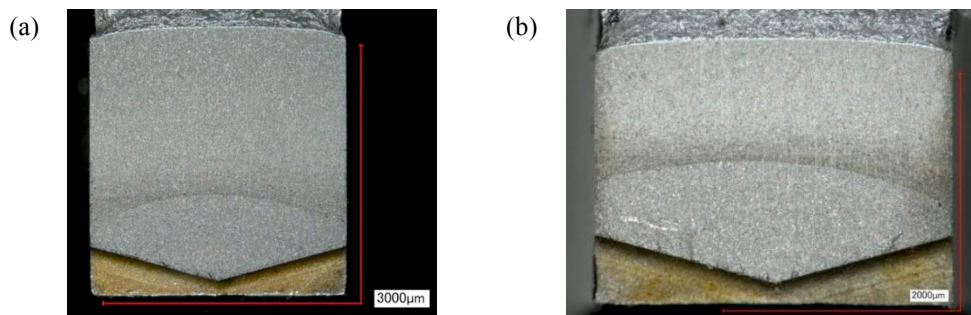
Fracture surfaces: (a) SEN B3 (6x3 mm specimen); (b) SEN B3 (4x3 mm specimen).
